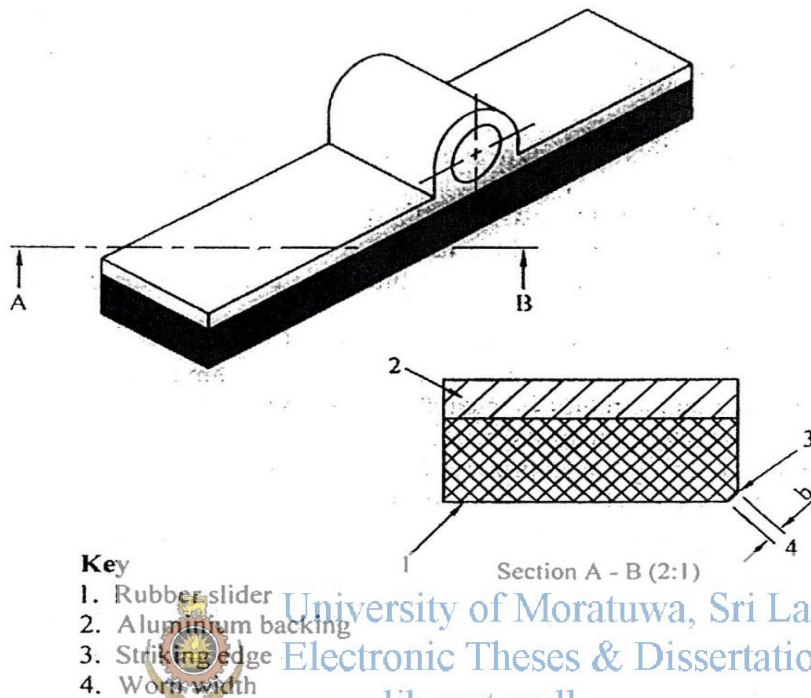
Slider assembly illustrating the maximum wear of striking edge
